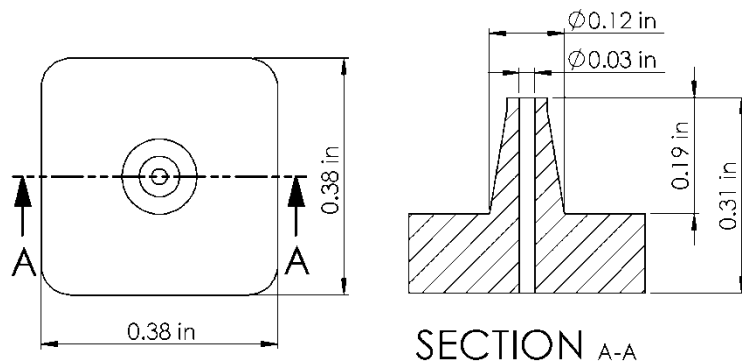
Cross-Sectional Drawing of the Custom-Made Plastic Adapter Body.
